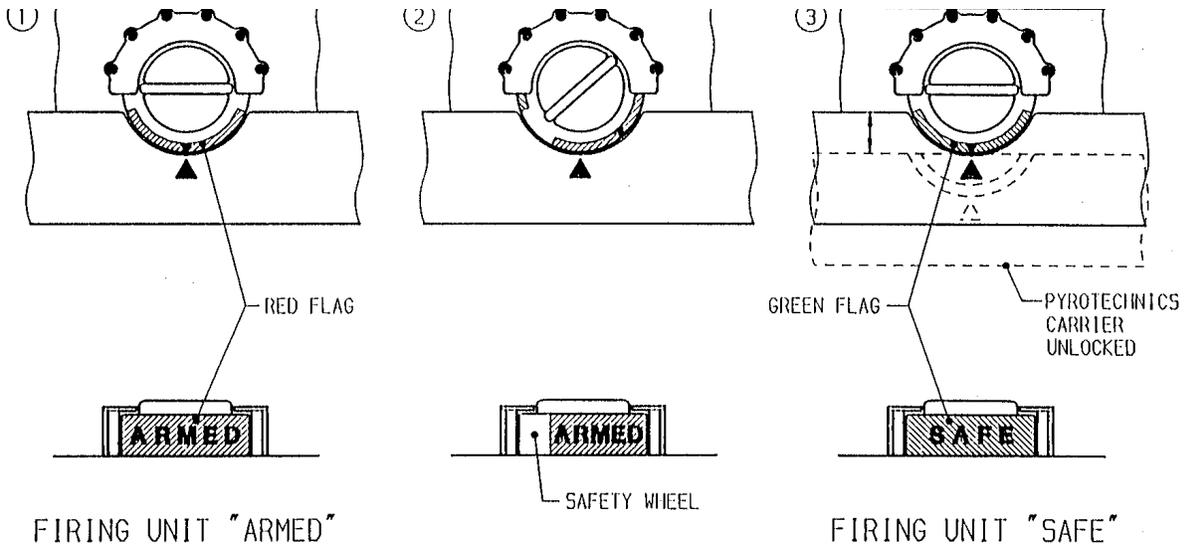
Side view on SAFE-WHEEL (Firing Unit)
